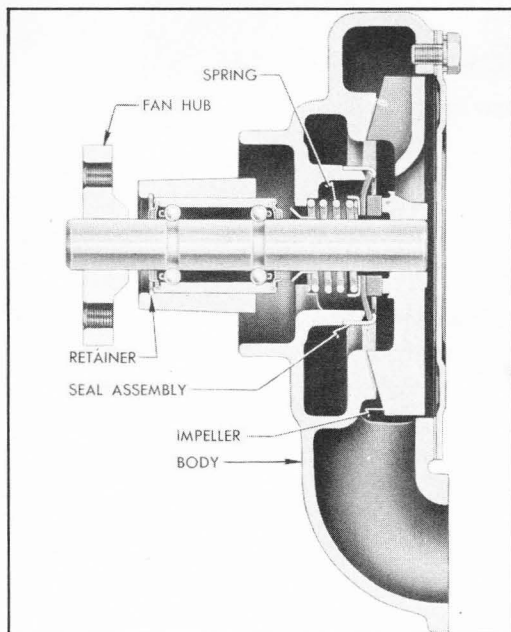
Sectional View of First Type Water Pump—1948 Engines
